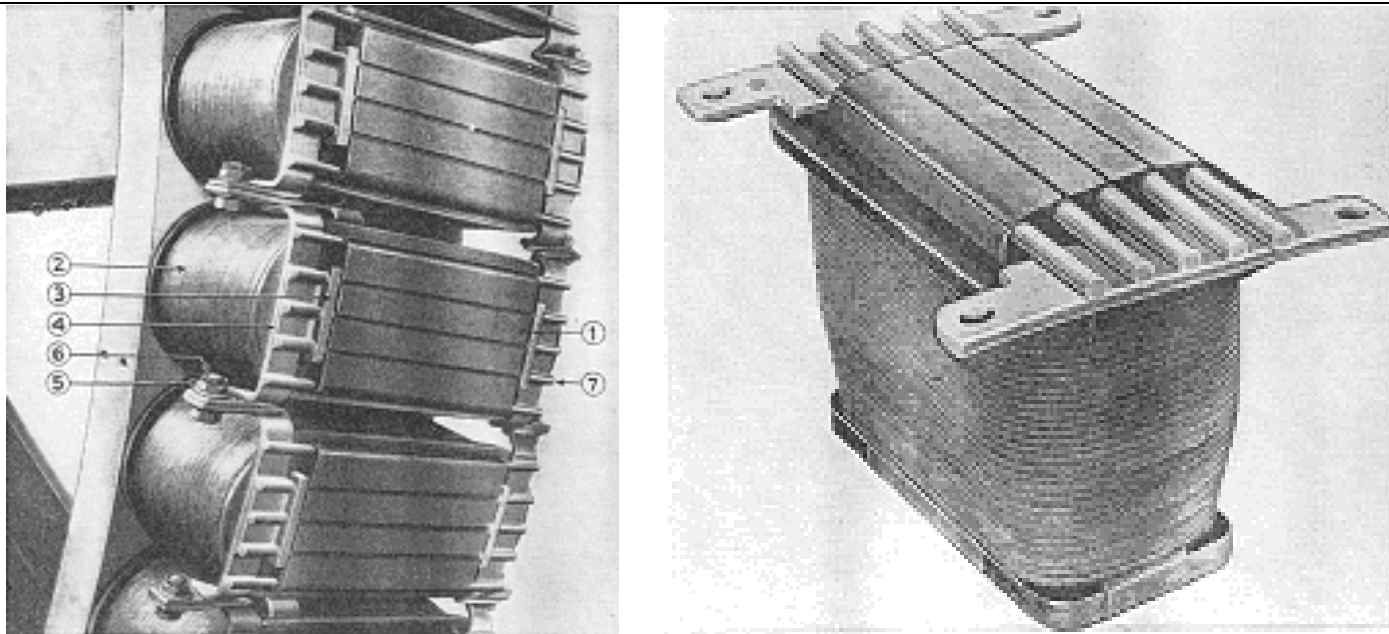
Squirrel-Cage Construction in the Rotor of a Synchronous Motor and the Squirrel Cage in the Pole Face
